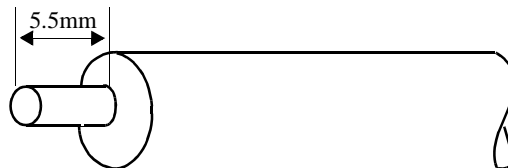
Terminal Block TB1 Side for Connecting Wire End
